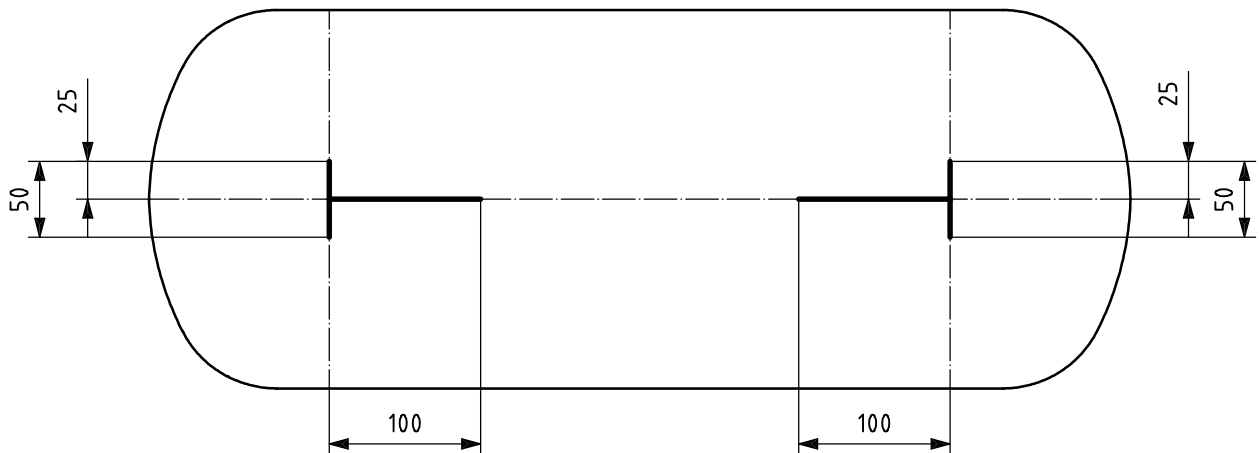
Welds radiography of a container with circumferential and longitudinal weld
